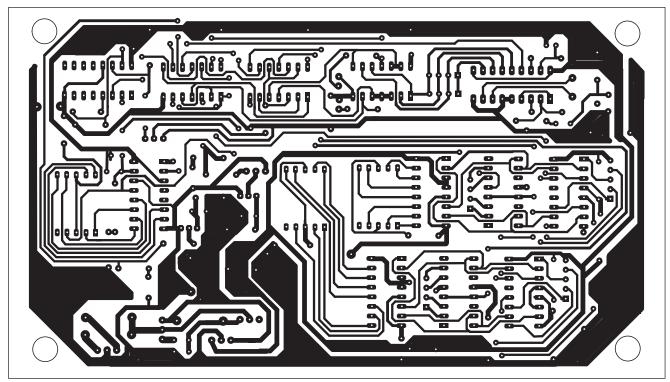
Actual-size, single-side PCB layout of the receiver, chance counter and relay driver circuit
